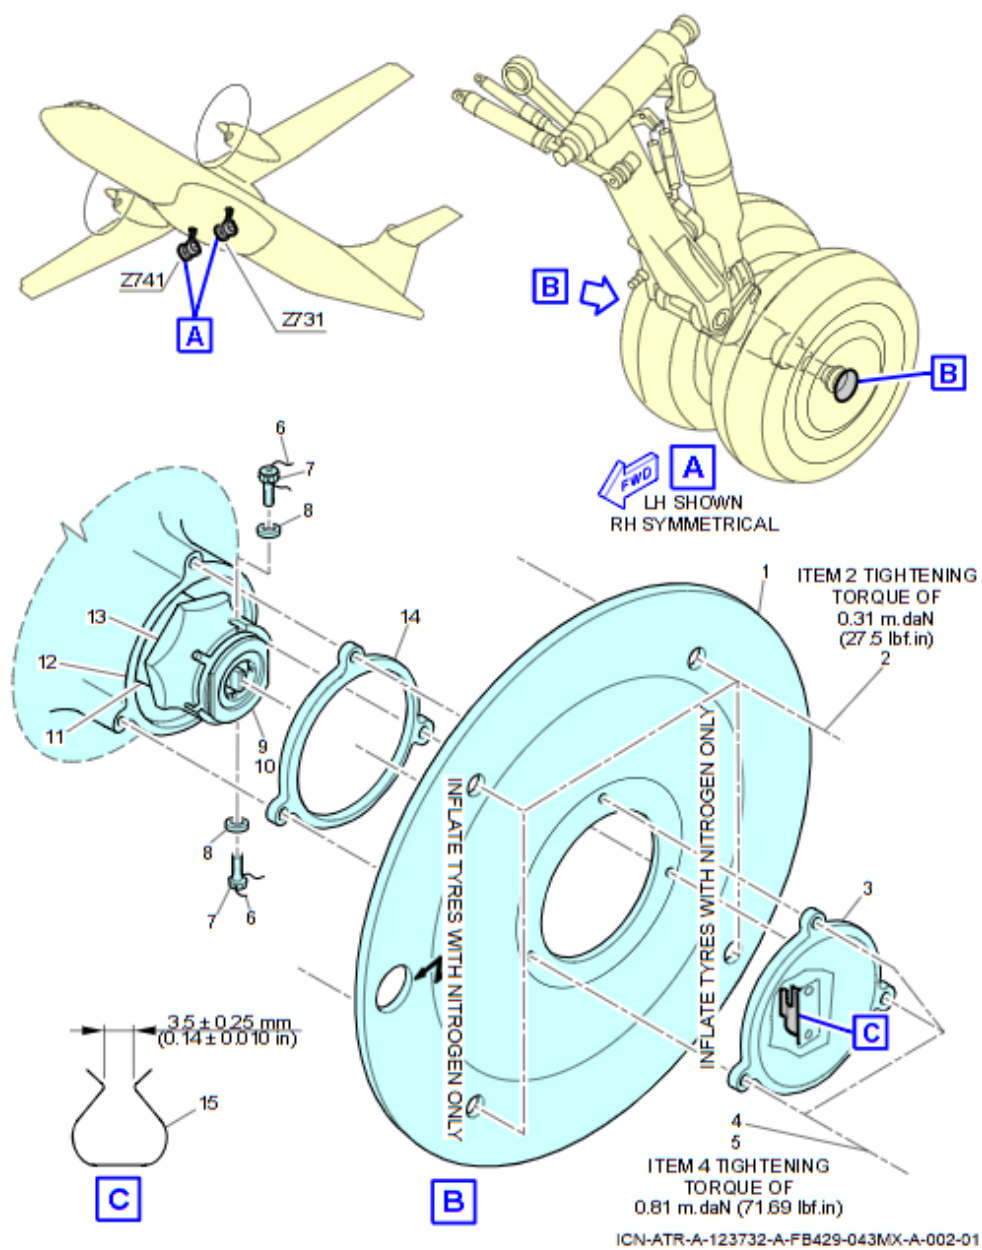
Figure ICN-ATR-A-123732-A-FB429-043MX-A-002-01 (SHEET 1) - Removal/Installation of MLG Wheel/Tire Assembly
